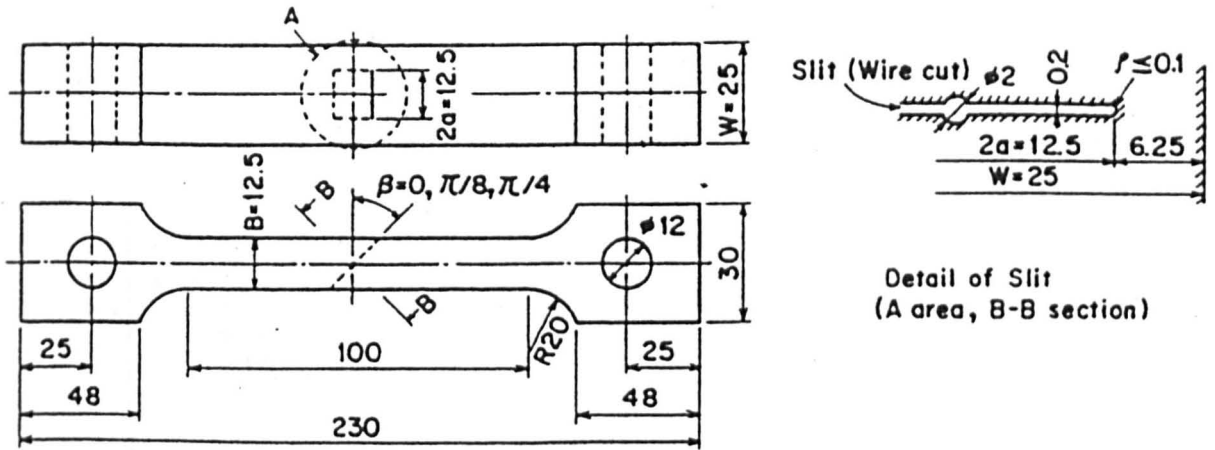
Configuration and dimension of the centre cracked plate specimen used by Yoshioka et al (1984).
